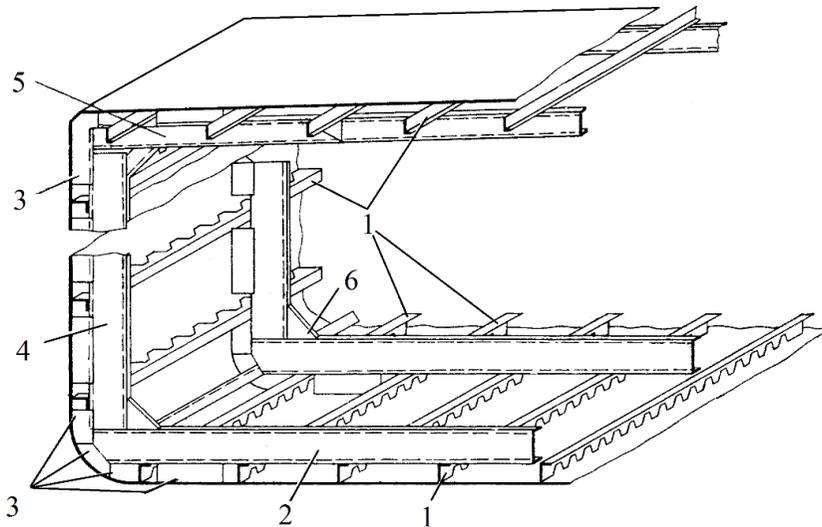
Construction of a Cistern Vessel (Tank Ship) with the Longitudinal System of Stiffening and Inner Frames from U-Profiles [Authors, 4]
